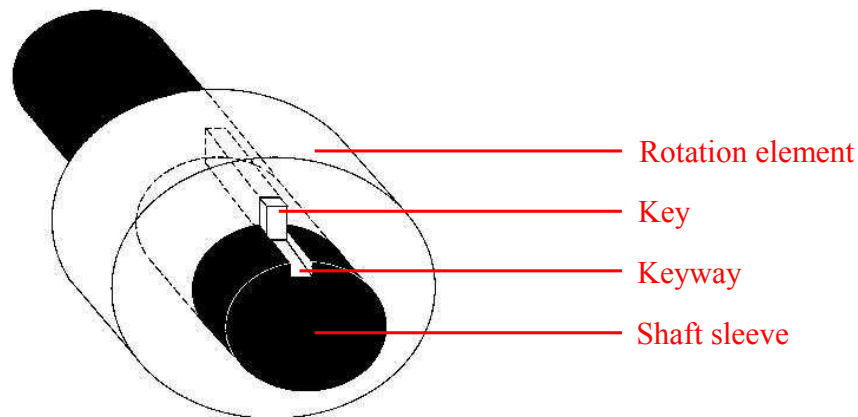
Keyed joint connection between bevel gear and shaft sleeve.
